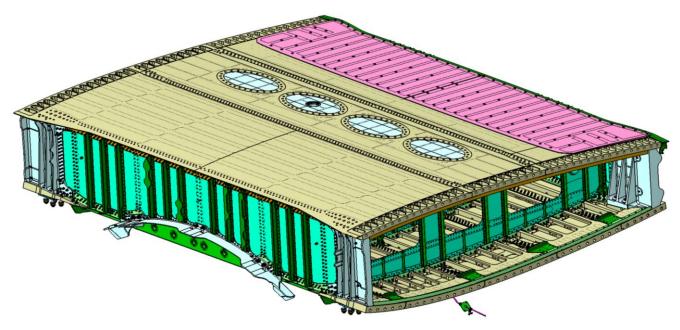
An-148 Aircraft Center Wing Section. Model Fragment
